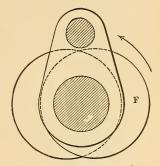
Two Eccentrics, Lapless Valve with Rocker.
